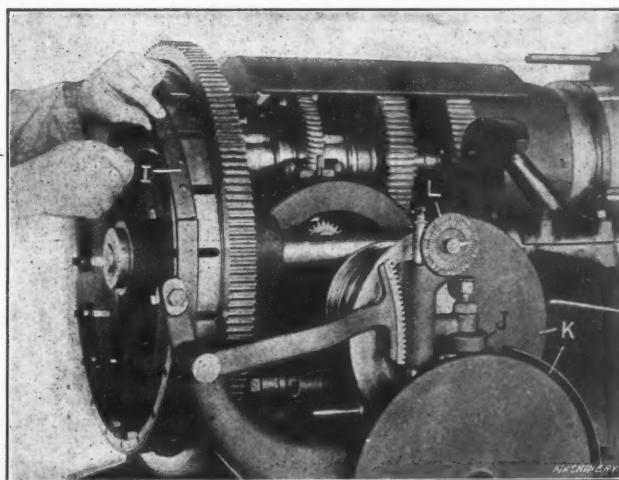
A Wide Variation of Feed for the Turret and Cross-slide Tools is secured by Regulating Drum Segment Cams. These can be adjusted while the Machine is in Operation
